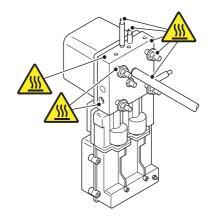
High temperature points on exposed sensor surfaces during operation
